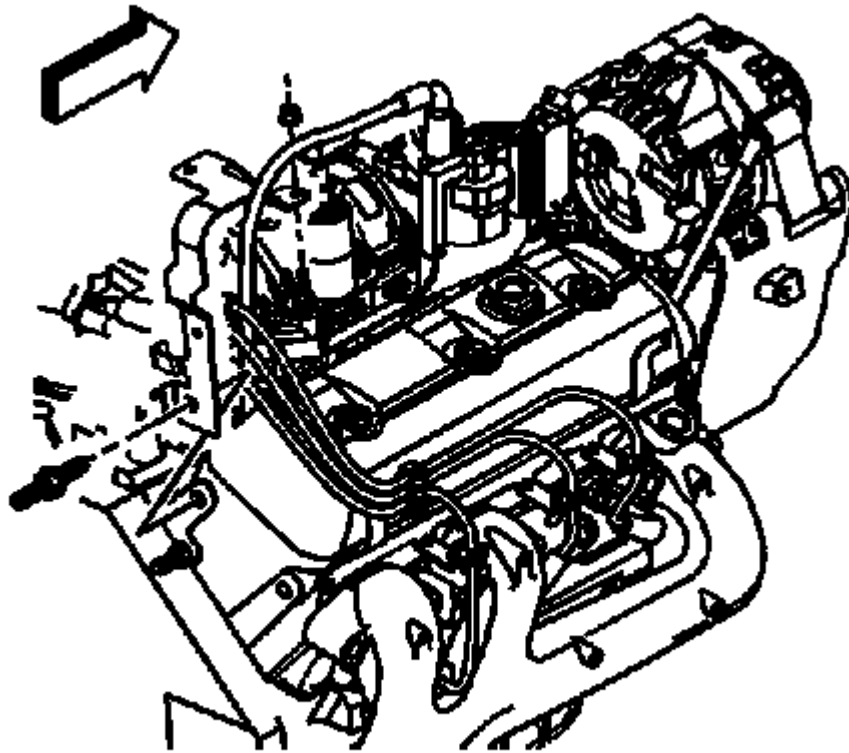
View Of Engine Wiring Harness Rear Bracket Nut
